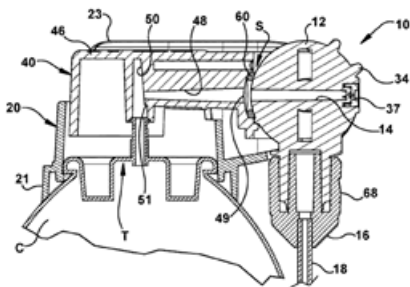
illustrates an expanded view of a rotatable valve assembly (12) enabling outlets (37) and (18) to be brought selectively into fluid communication with a passage (48).
